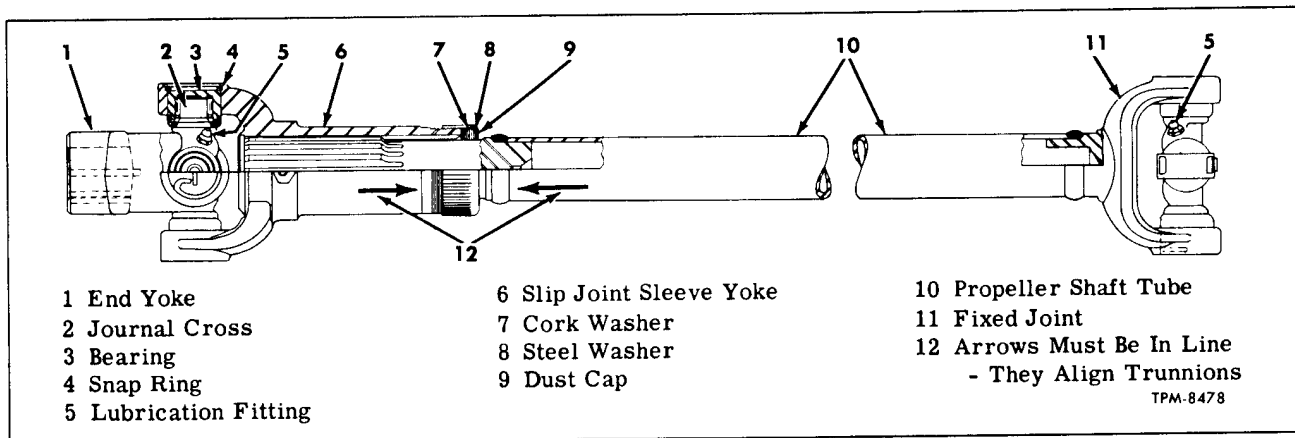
Steering Propeller Shaft (Front Shaft Shown)
